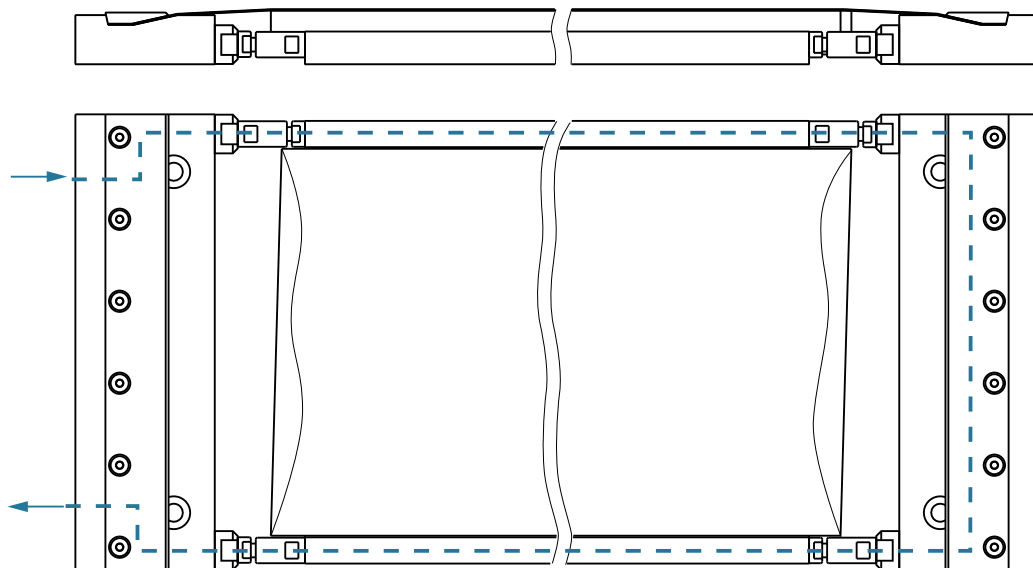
Secondary section cooling for motors of sizes 1FN3050 ... 1FN3450 with combi adapter and combi end piece (side and top view)
